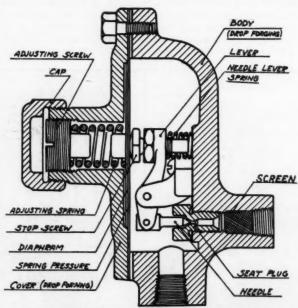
CUTAWAY OF ZEROZONE EXPANSION VALVE
